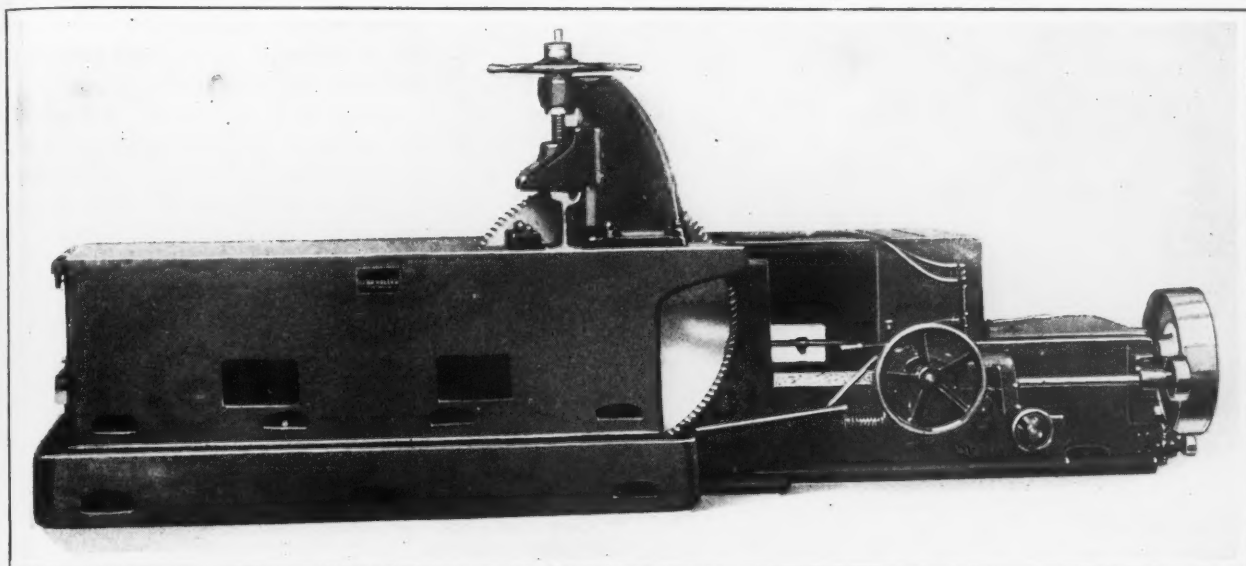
Saw for Straight and Miter Cutting of Structural Steel Members
